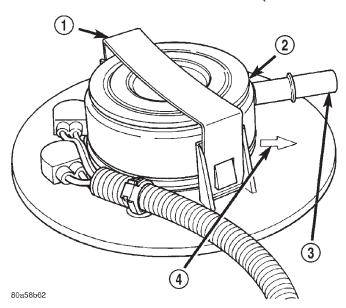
Fuel Filter/Fuel Pressure Regulator
